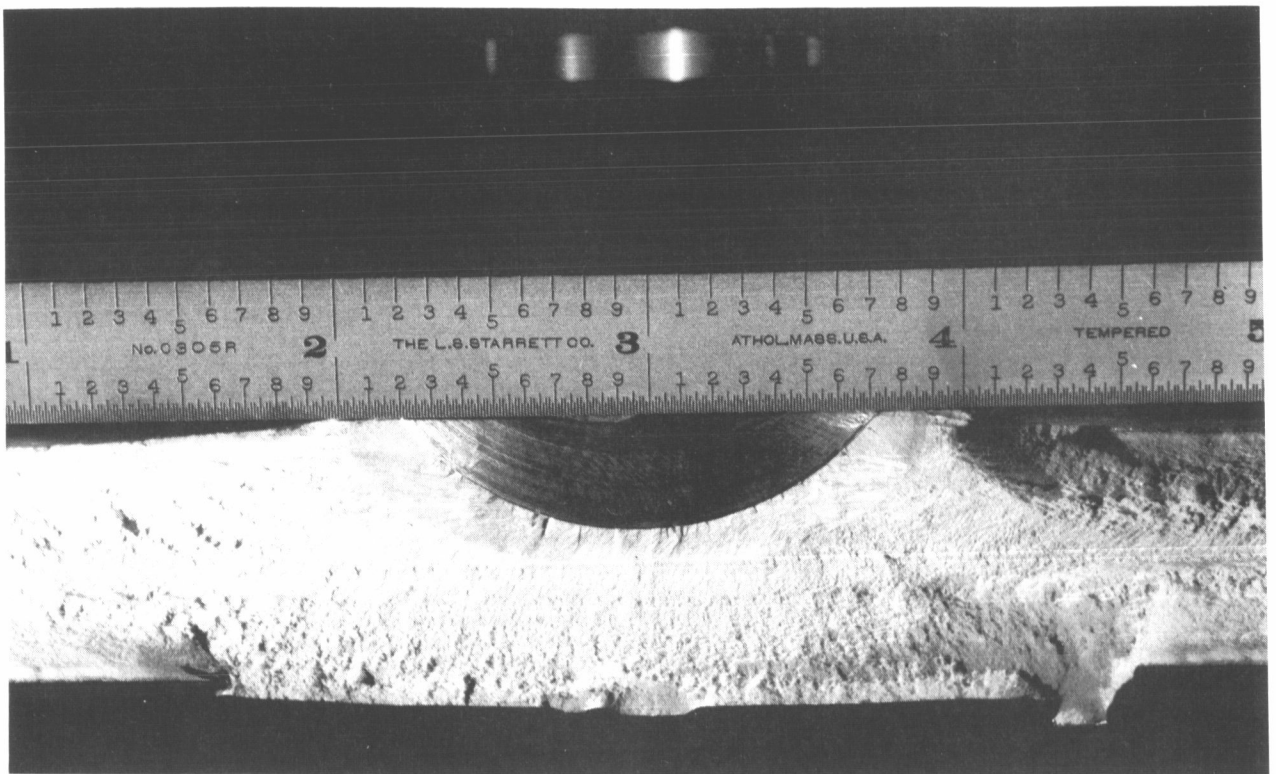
Fracture Surface of Welded 2219-T81 Aluminum Plate (Crack in Weld Metal, 75° F)
